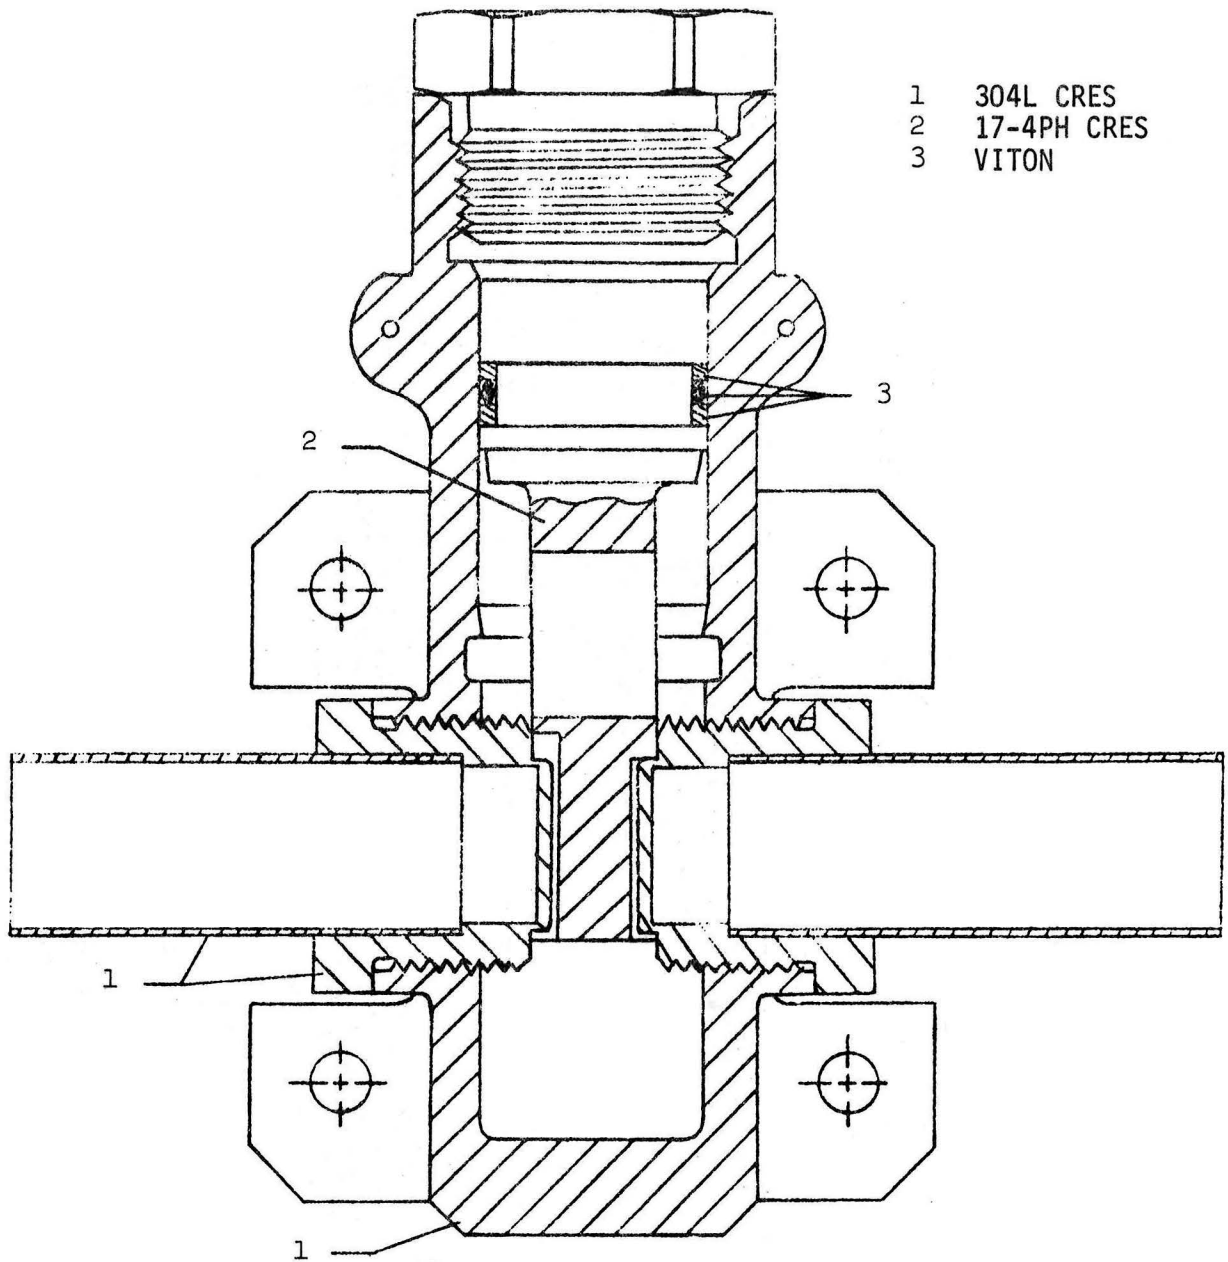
PROPELLANT EXPLOSIVE VALVE.
